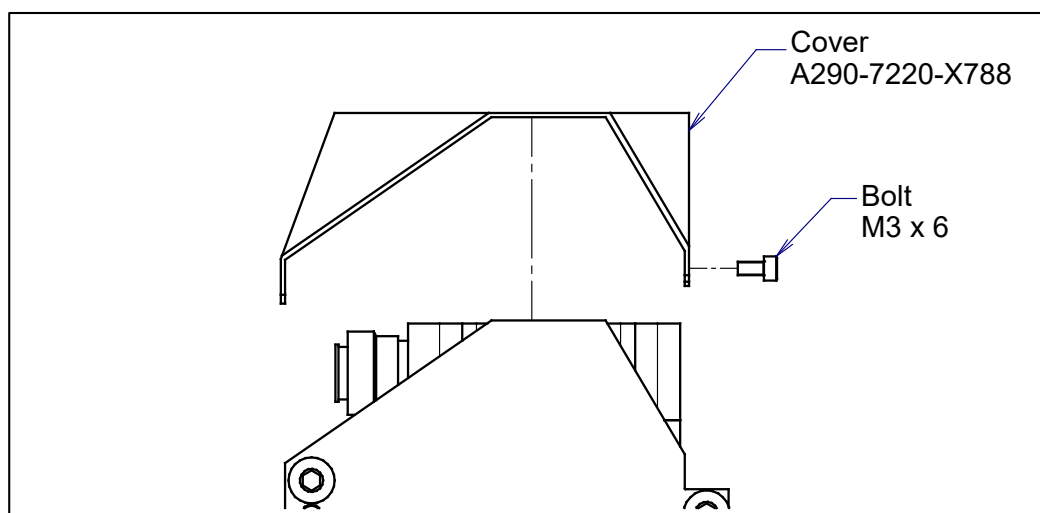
(b) Replacing motor cover (Servo torch for mild steel)
